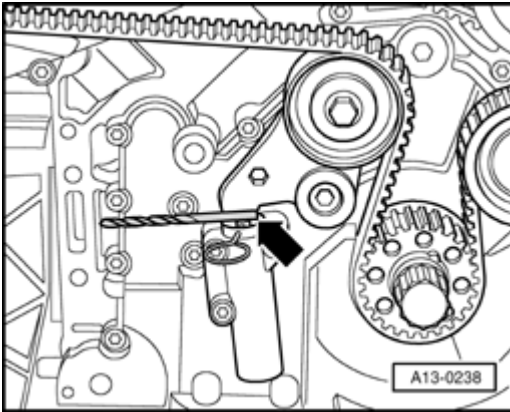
Drill Set Between Tensioning Lever And Piston Of Hydraulic Element
